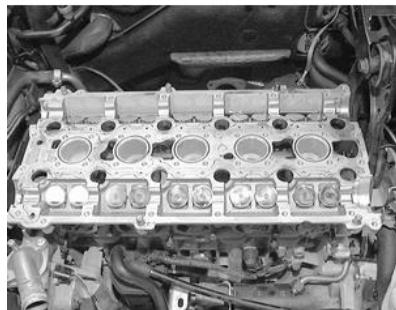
Loosen the cylinder head bolts starting from the inside and working outward
